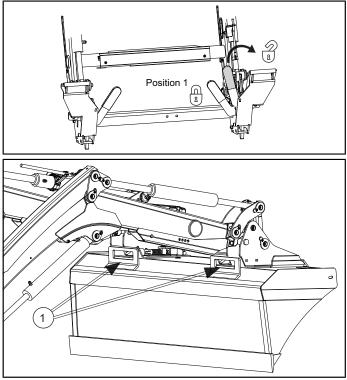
Visually check that the locking pins (1) on the Skidsteer quick attach are engaged and locked onto the implement's contact surface.
